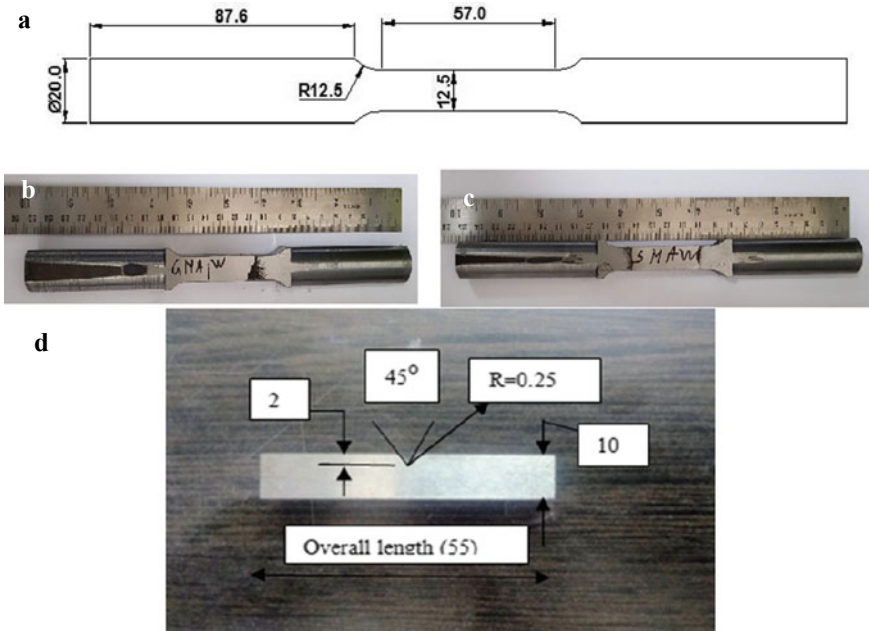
a Schematic of tensile specimen, b tensile specimen of JG welded joint, c tensile specimen of JS welded joint, and d impact specimen with specifications
